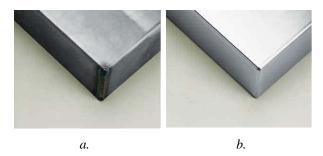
Welded joint after welding (a) and pickling treatment (b)
